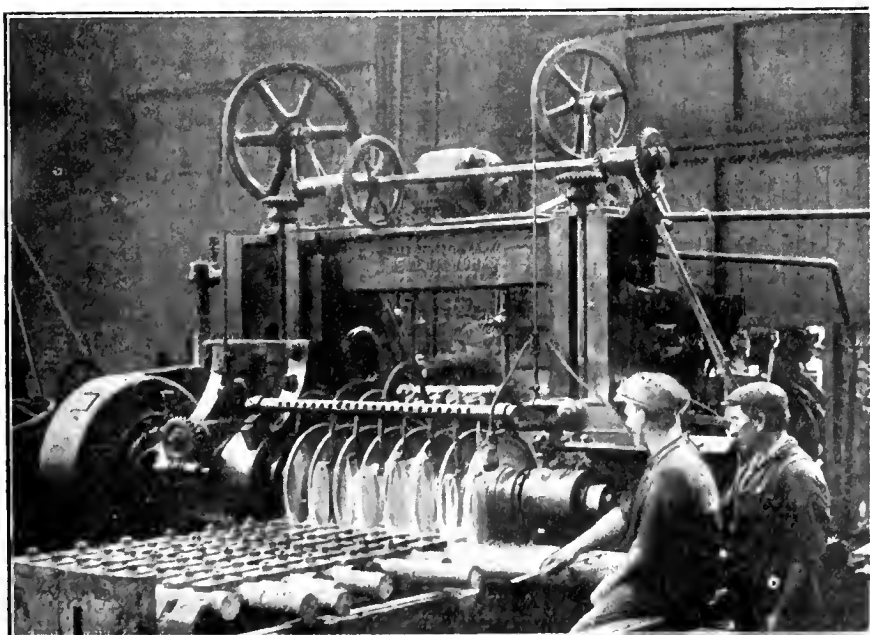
CUTTING-OFF 3.3 HIGH EXPLOSIVE SHELL BILLETS ON A "NILES-BEMENT-POND" MILLER.
